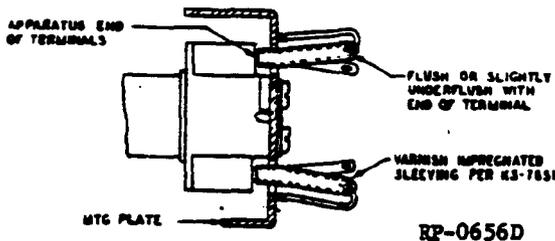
SLEEVED TERMINALS - APPARATUS WITH SURFACE WIRING (PAR. 3.542)
